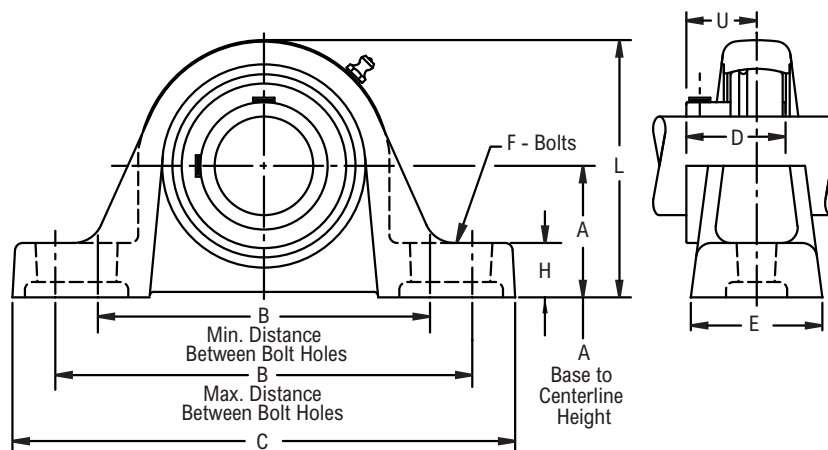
Bolt Ball Bearing Pillow Block Unit
